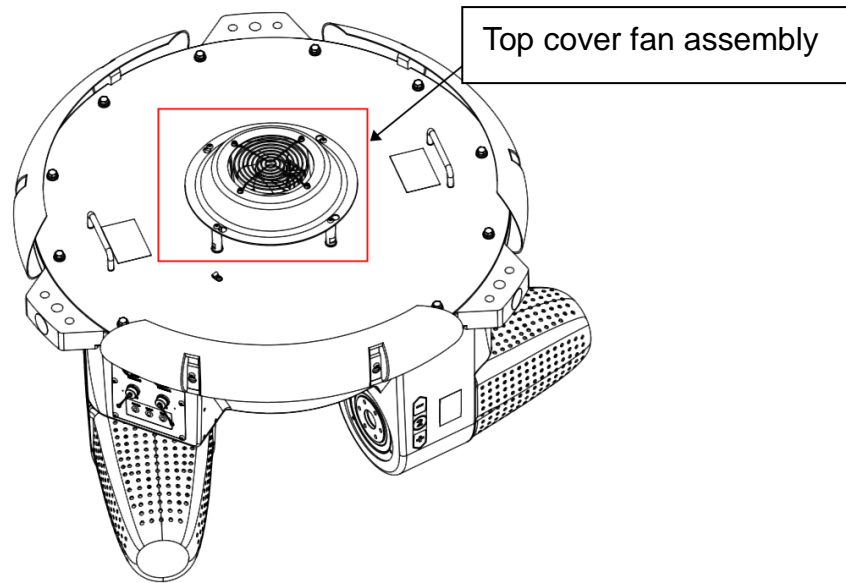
Schematic diagram of the location of the top cover fan assembly
